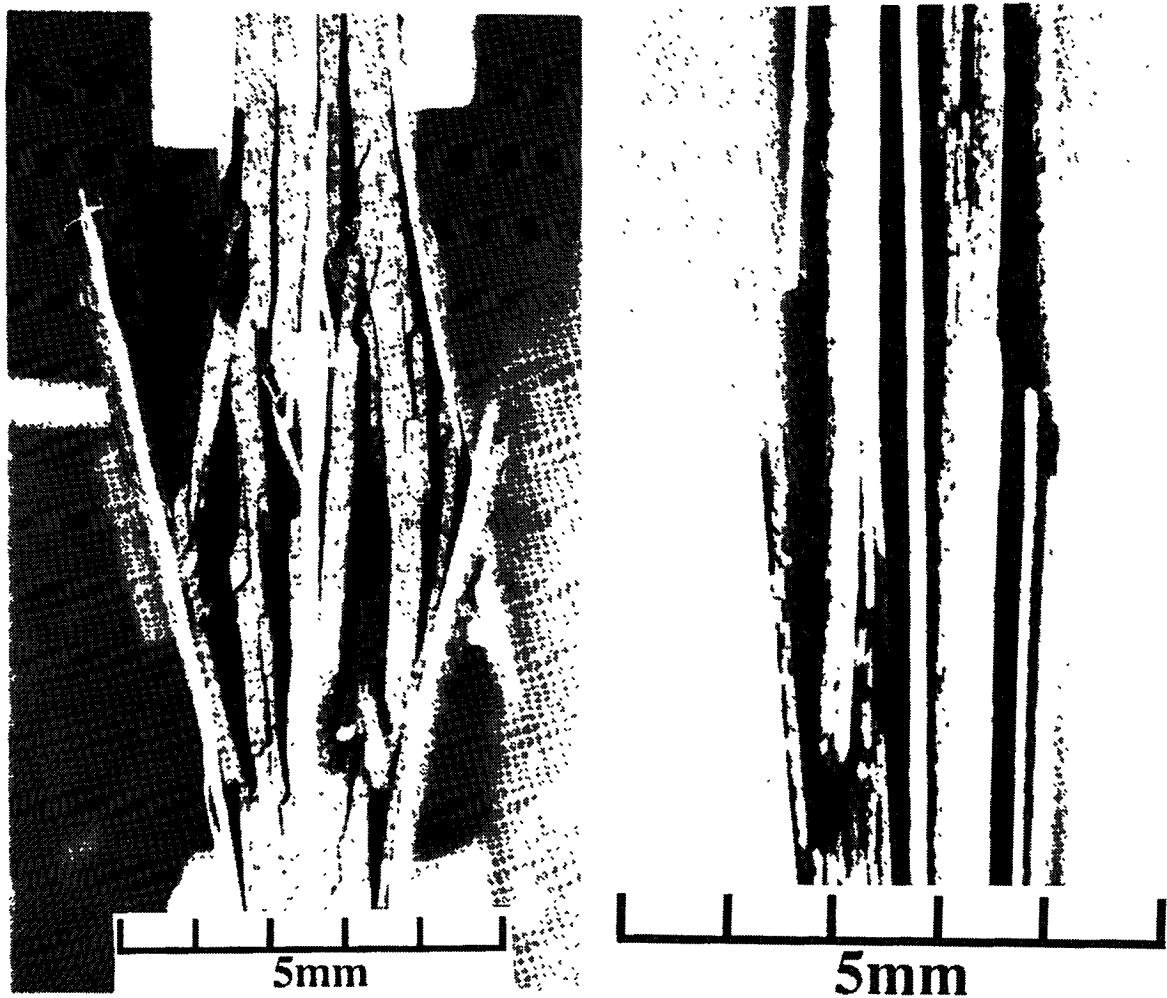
Failed Compression Specimens. Left: Celanese Right: New Fixture
